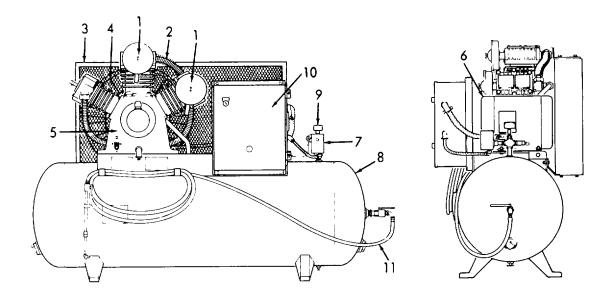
Compressor Unit, Reciprocating, 25 CFM, 175 PSI, Electric Motor Driven.
